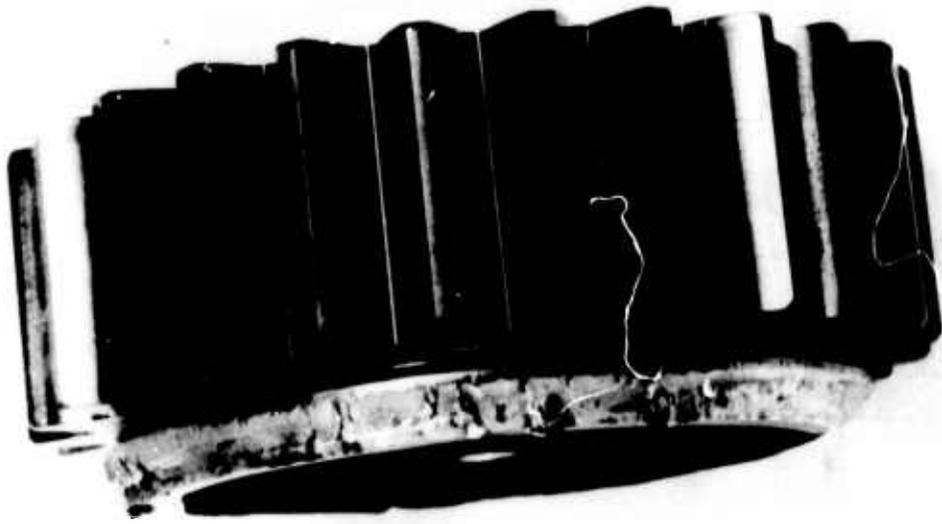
Second-Row Pinion (One of two ring gear mesh gears) Weld Separation.
